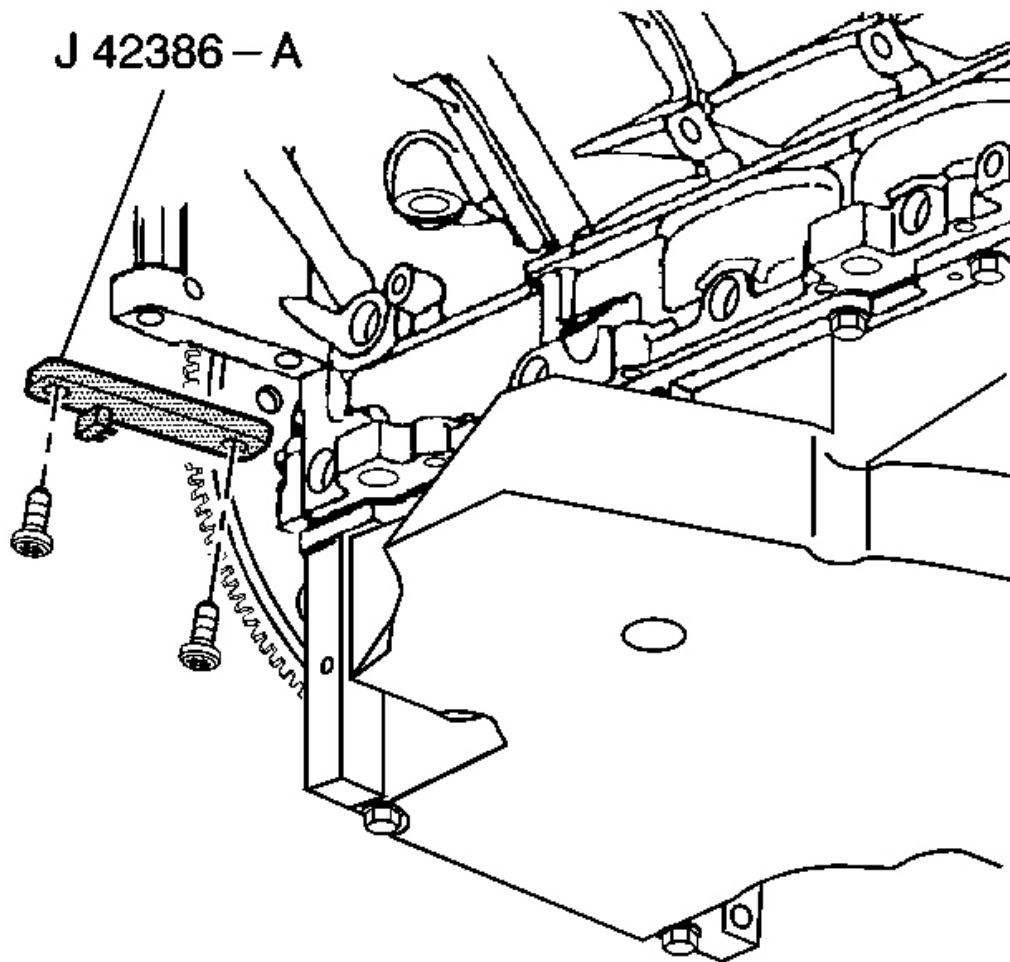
J 42386-A, Crankshaft Balancer & Bolt
